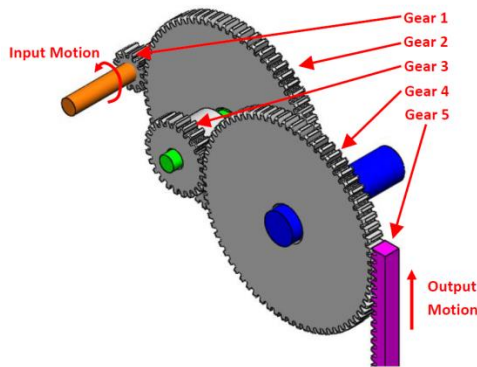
, Mechanism composed of spur and rack gears. Gears 2 and 3 form a compound gear.
